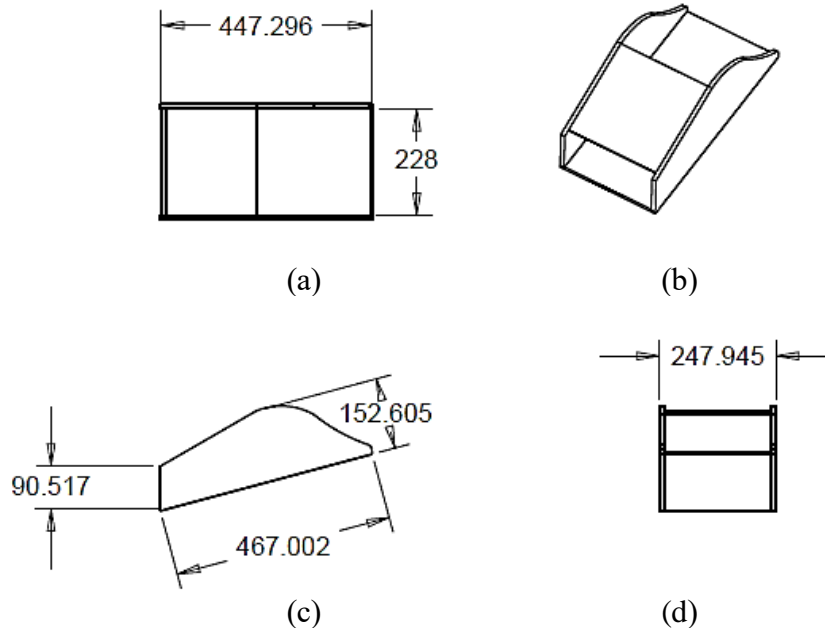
Feeding channel (a) Top view, (b) Isometric view, (c) Front view and (d) Side view
